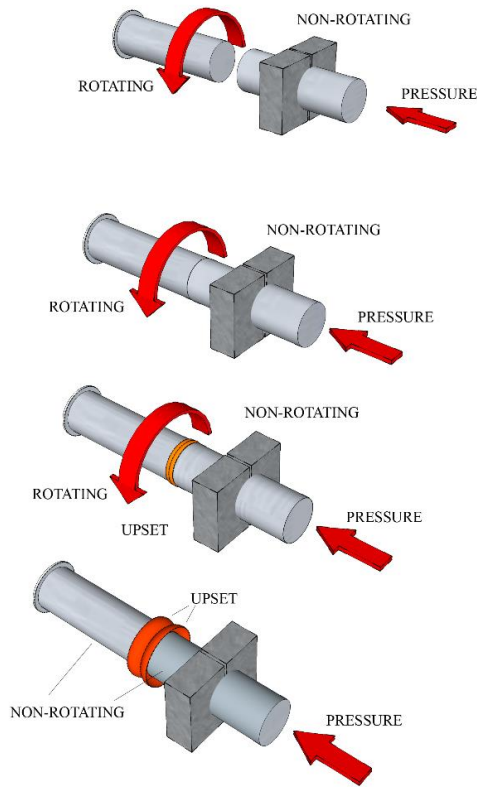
Rotational welding, image courtesy of Gatwick Technologies [94].
